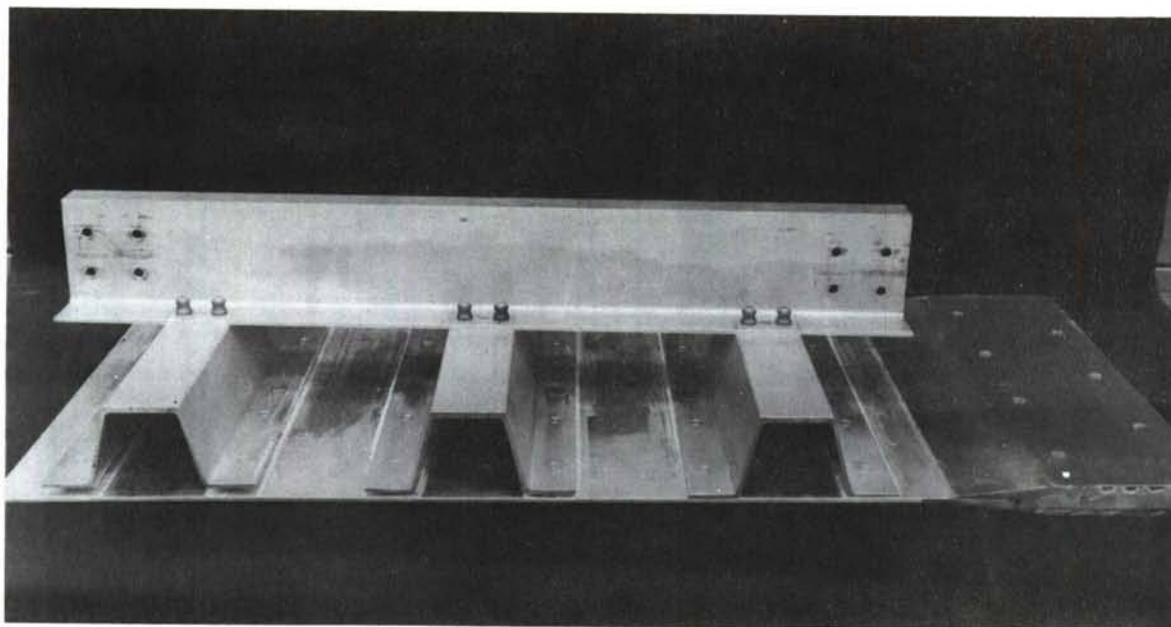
WELDBOND "HAT" SPECIMEN MODIFICATION (HILOKS
